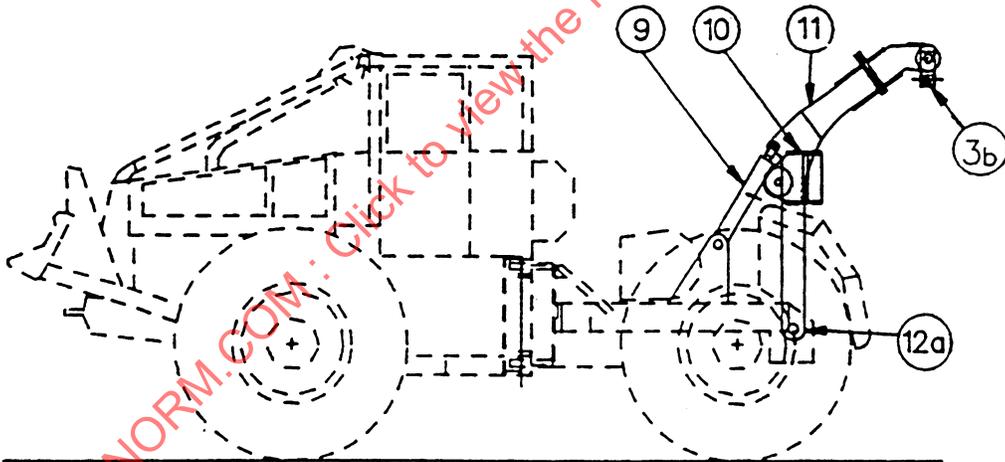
SINGLE FUNCTION BOOM ASSEMBLY—LOG BUMPER MOUNTED
